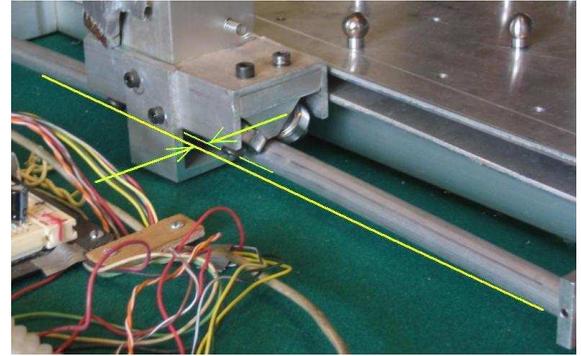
The distortion of lowest guide-way coincide with CAD equivalent, drew in magenta in fig 3.
